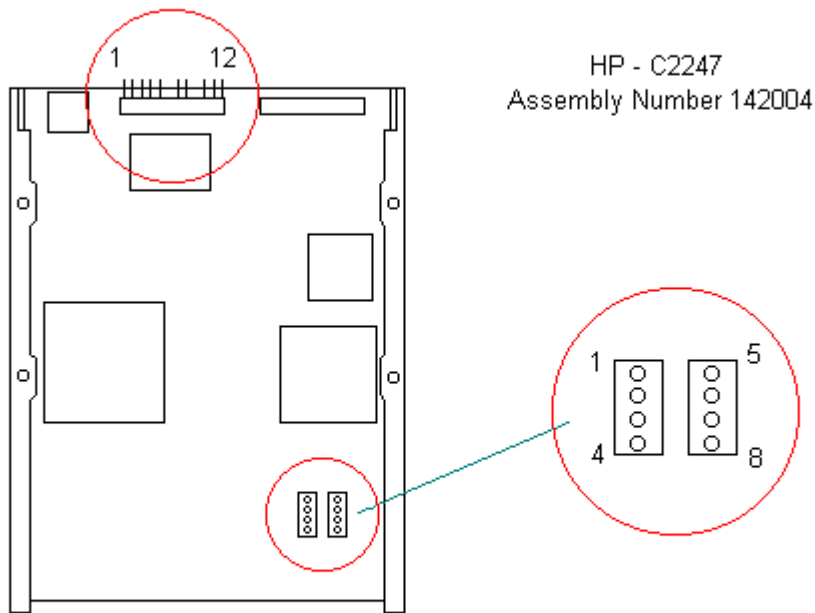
1.05 GB HP SCSI Hard Drive Jumper Locations
